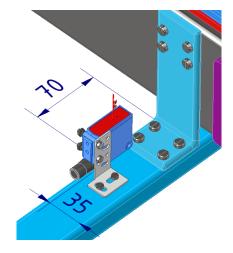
Assembly of the sensor and the mounting system seem from opposite corners.
